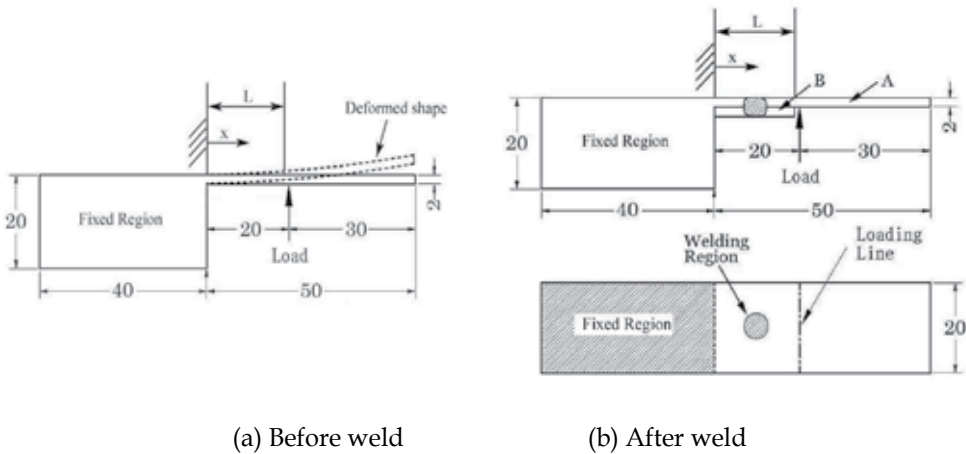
Dimensions of the specimen used for measurement of out-of-plane displacement. (a) Normal cantilevered plate, (b) Spot welded cantilevered plate.
